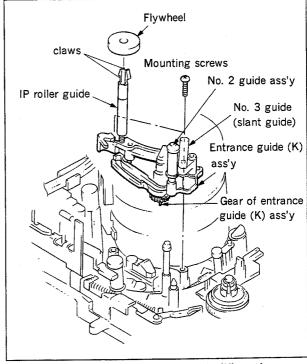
Parts of entrance guide (K) ass'y
